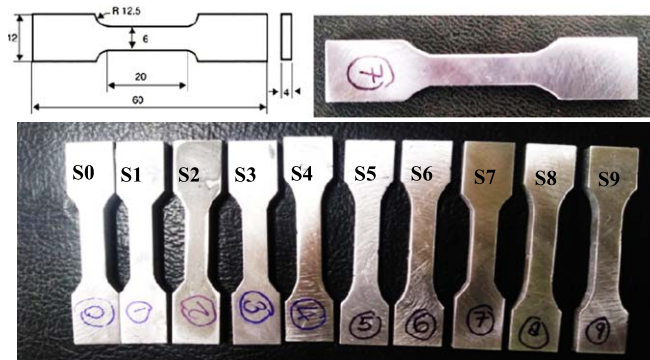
Specimens for tensile testing (all the dimensions are in mm).
